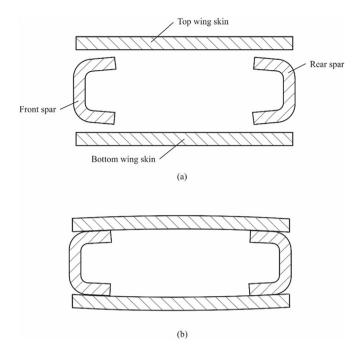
Diagram showing an example of the generation of assembly stress: (a) wing box components before assembly, (b) wing box structure after assembly.
